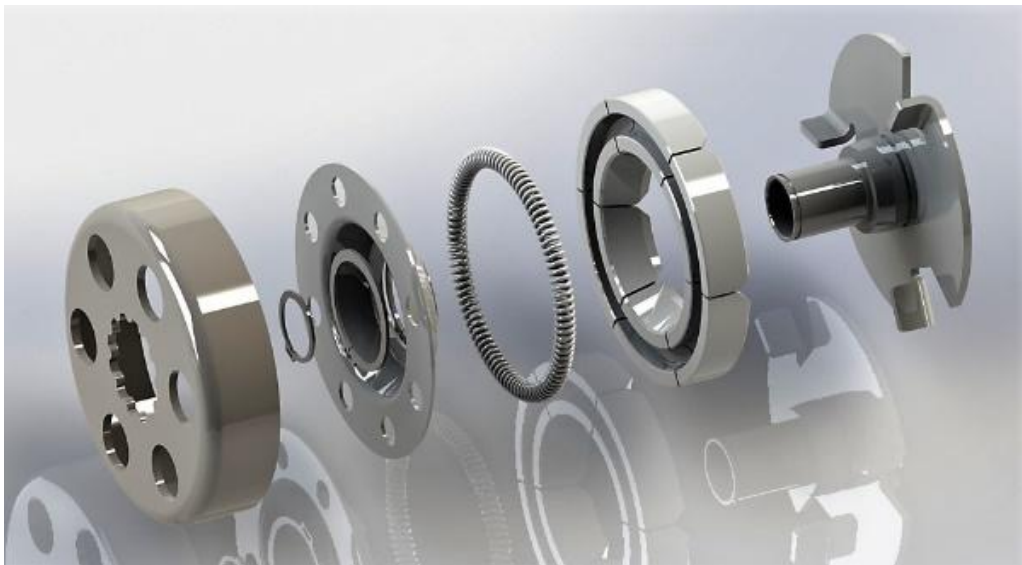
EXPLODED VIEW OF CENTRIFUGAL CLUTCH
